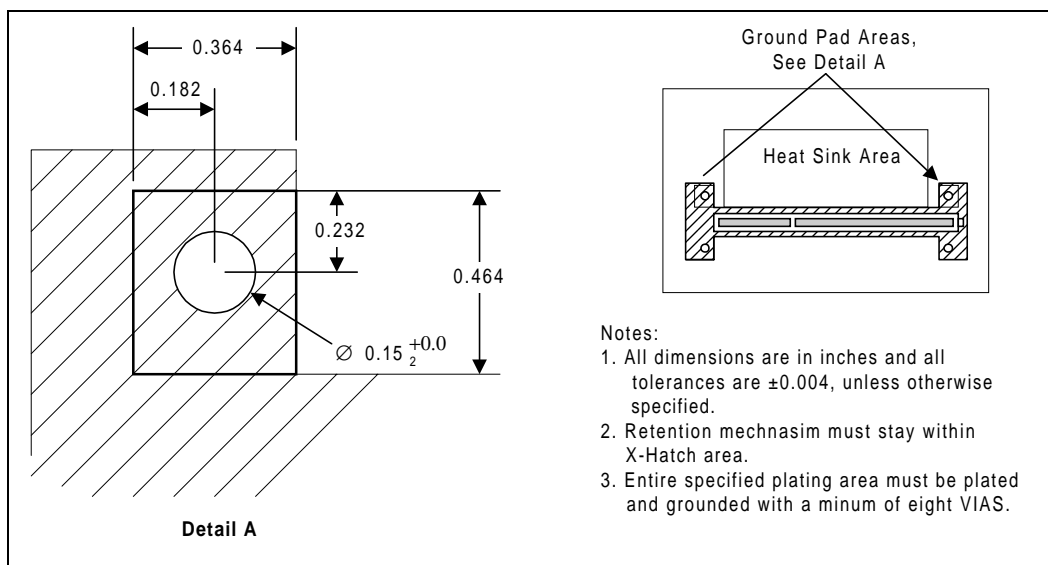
Hole Locations and Keep-out Zones for Support Components
